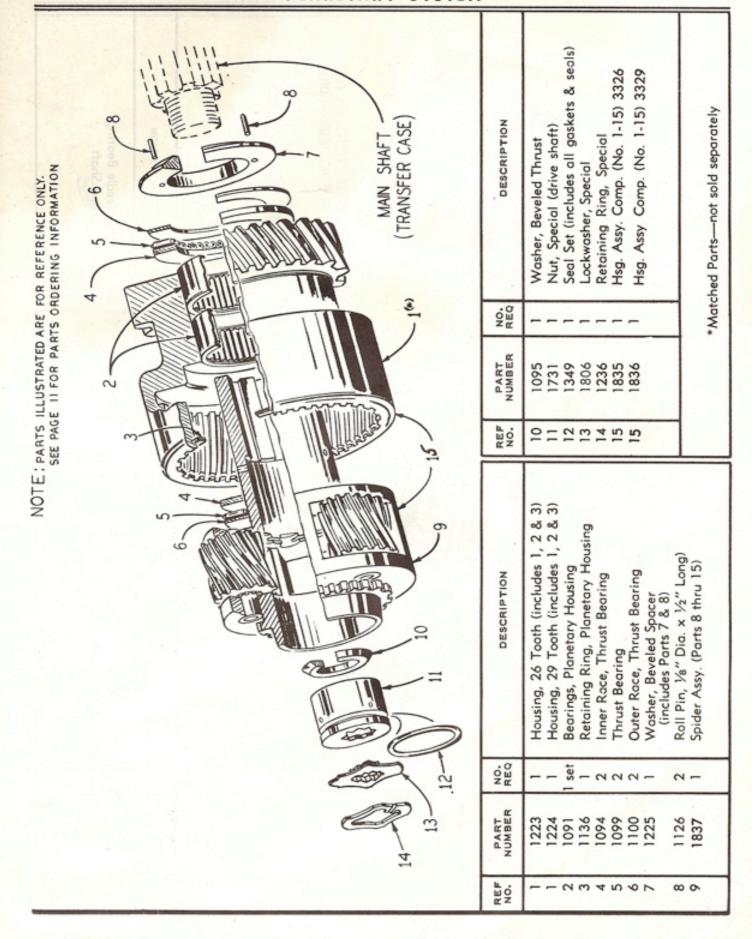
POWER TAKE-OFF (EXPLODED VIEW)
